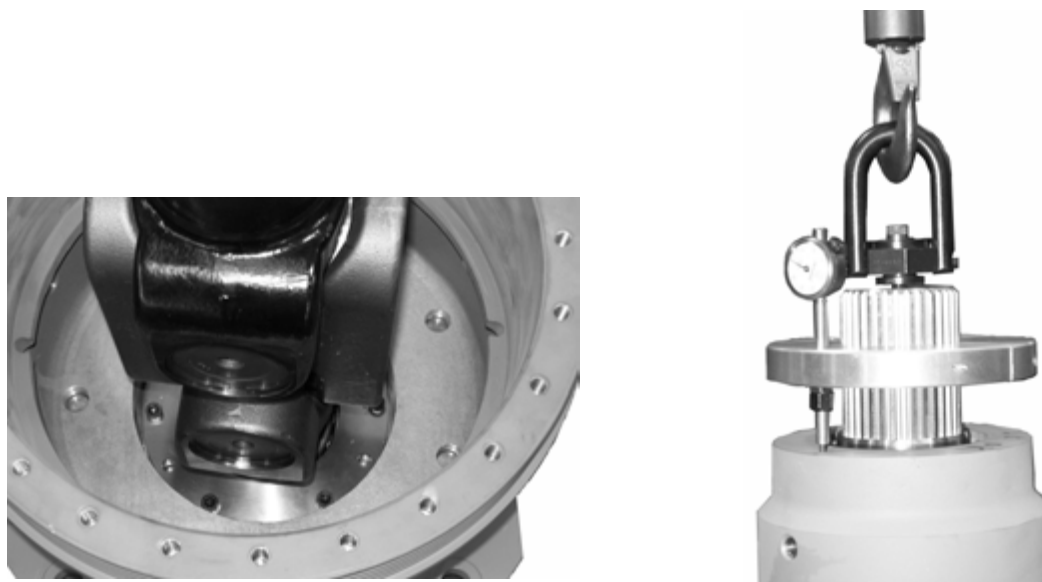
Install Four Capscrews to Retain Sleeve (left), and Turn Over and Measure End Play (right)
